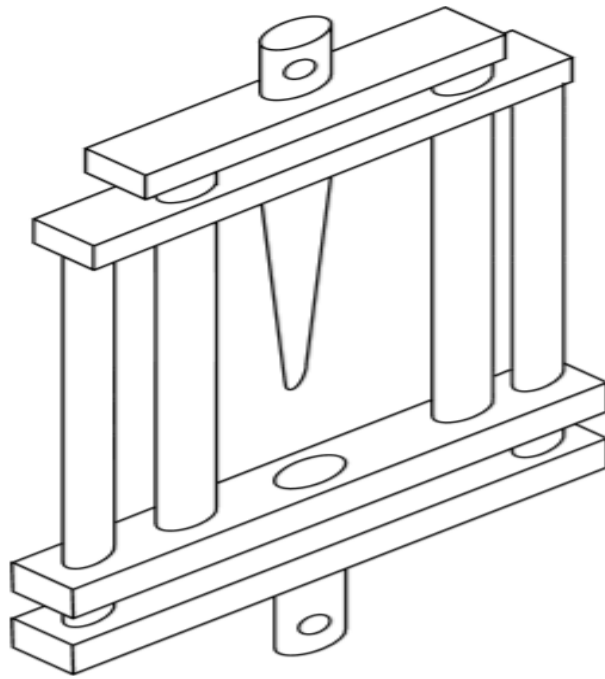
COMPRESSION JIG WITH CONICAL PLUNGER AND HOLE ON THE PLATFORM
